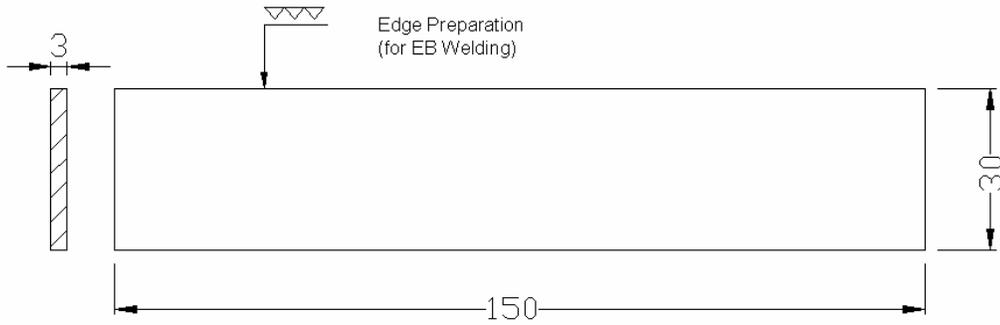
Mill Annealed Ti6Al4V Weld Specimen
